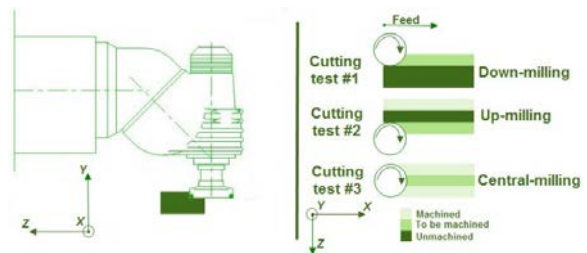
Cutting tests outline. Three different cutting tests are performed in order to obtain the 9 terms of $[\Phi]$ matrix: down-milling cut, up-milling cut and central-milling cut.
